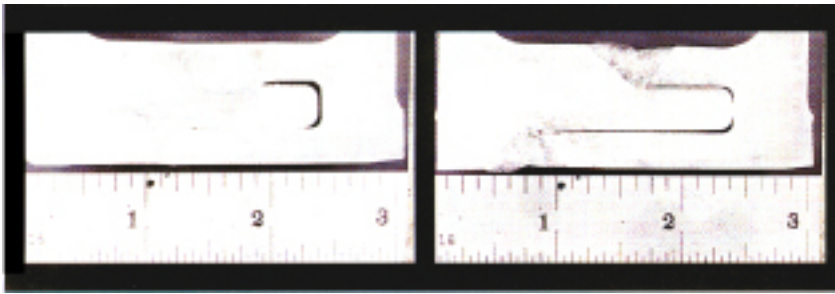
Cross-sections showing the macrostructures of two welds: (a) friction stir weld and (b) 4pass GMAW welds made with 4043 filler metal.
